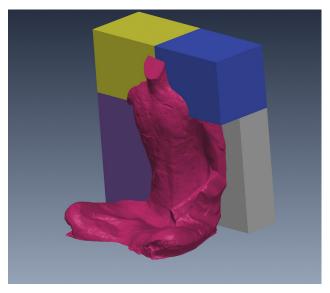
Partial view of inverted model and mold sections generated in preparation for CNC milling
